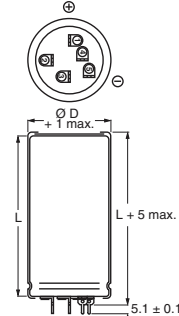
Printed wiring pin version (Case Ø D = 40 mm)
